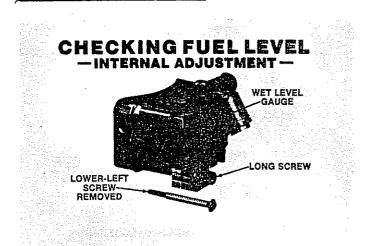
CHECKING FUEL LEVEL WITH KENT-MOORE GAUGE
